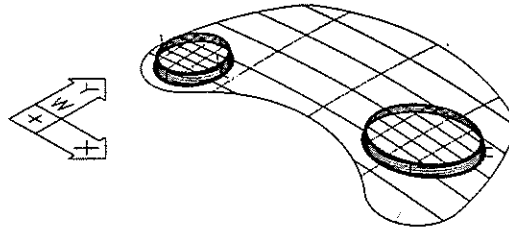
Fillet surfaces between the raised buttons and top surface constructed
